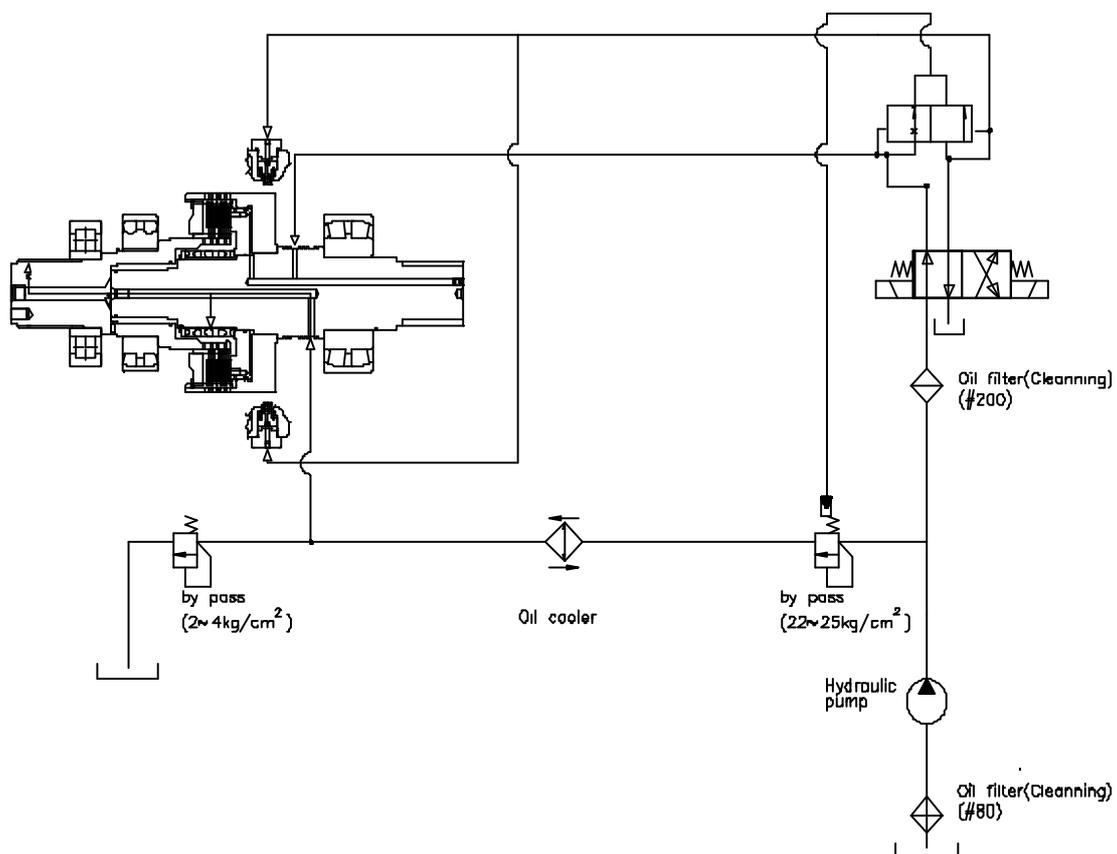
PTO main body/control box that solenoid valve is installed
